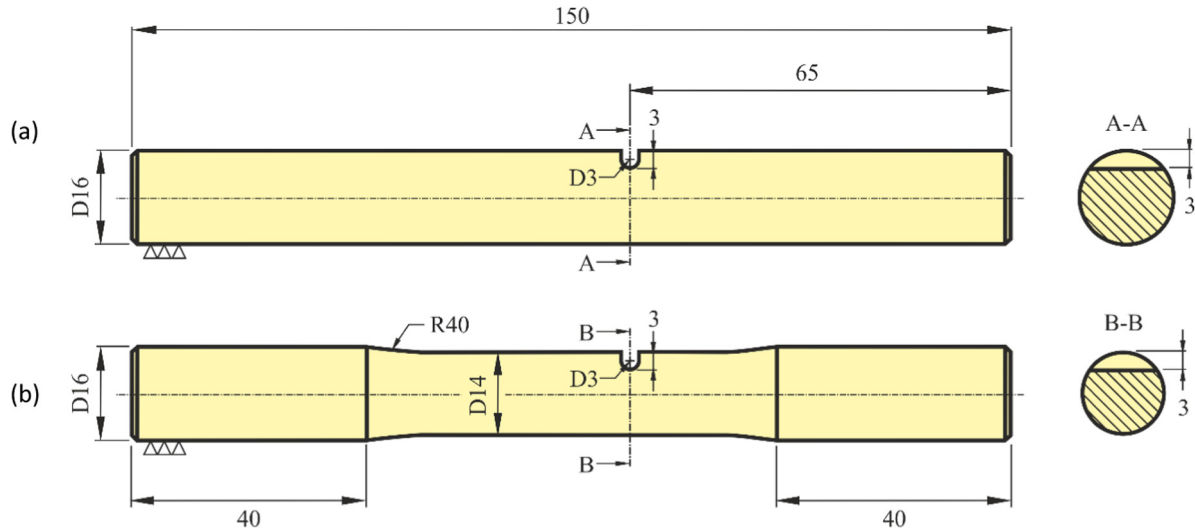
Specimen geometries used in: (a) single bending and bending-torsion tests; and (b) single torsion tests (dimensions in millimetres).
